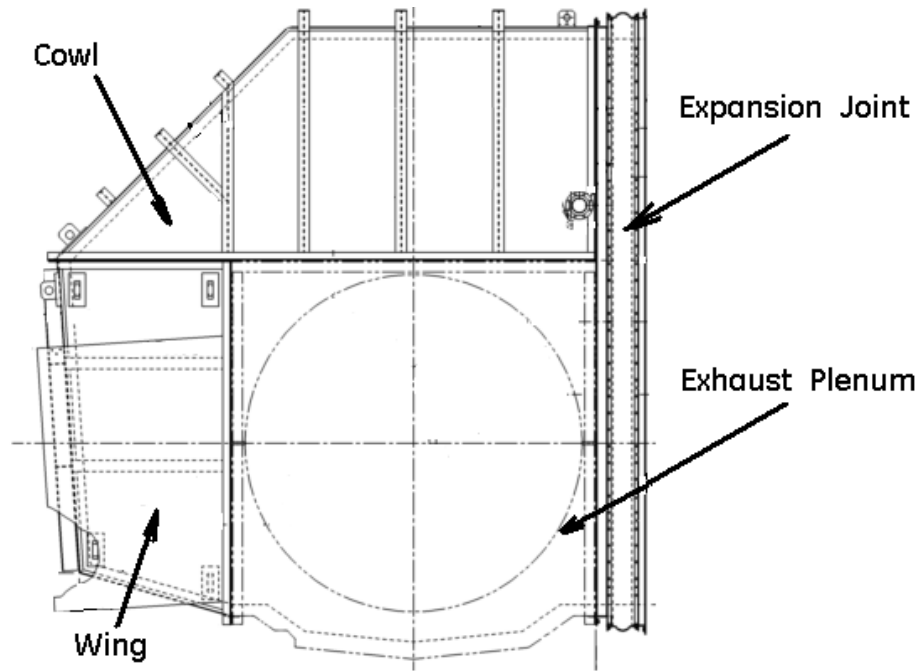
Typical B, C & E class MLI A042 & 1625 Arrangement
